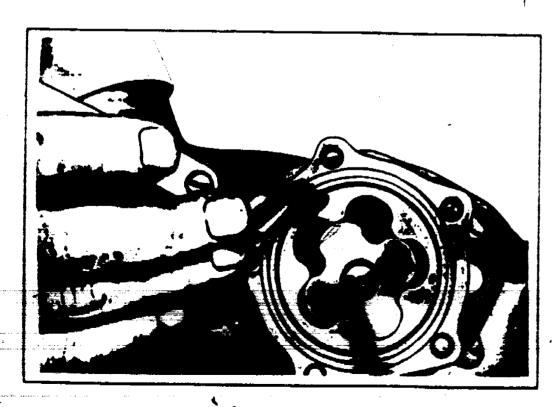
Thecking Clearance Between Outer Rotor and Body.
